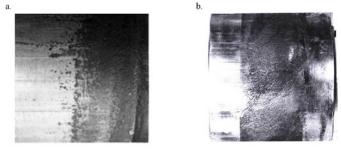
Fretting wear at the edge of axle wheel seat: a) traditional wheel set [2], b) wheel set with automatic wheel track change [13]
